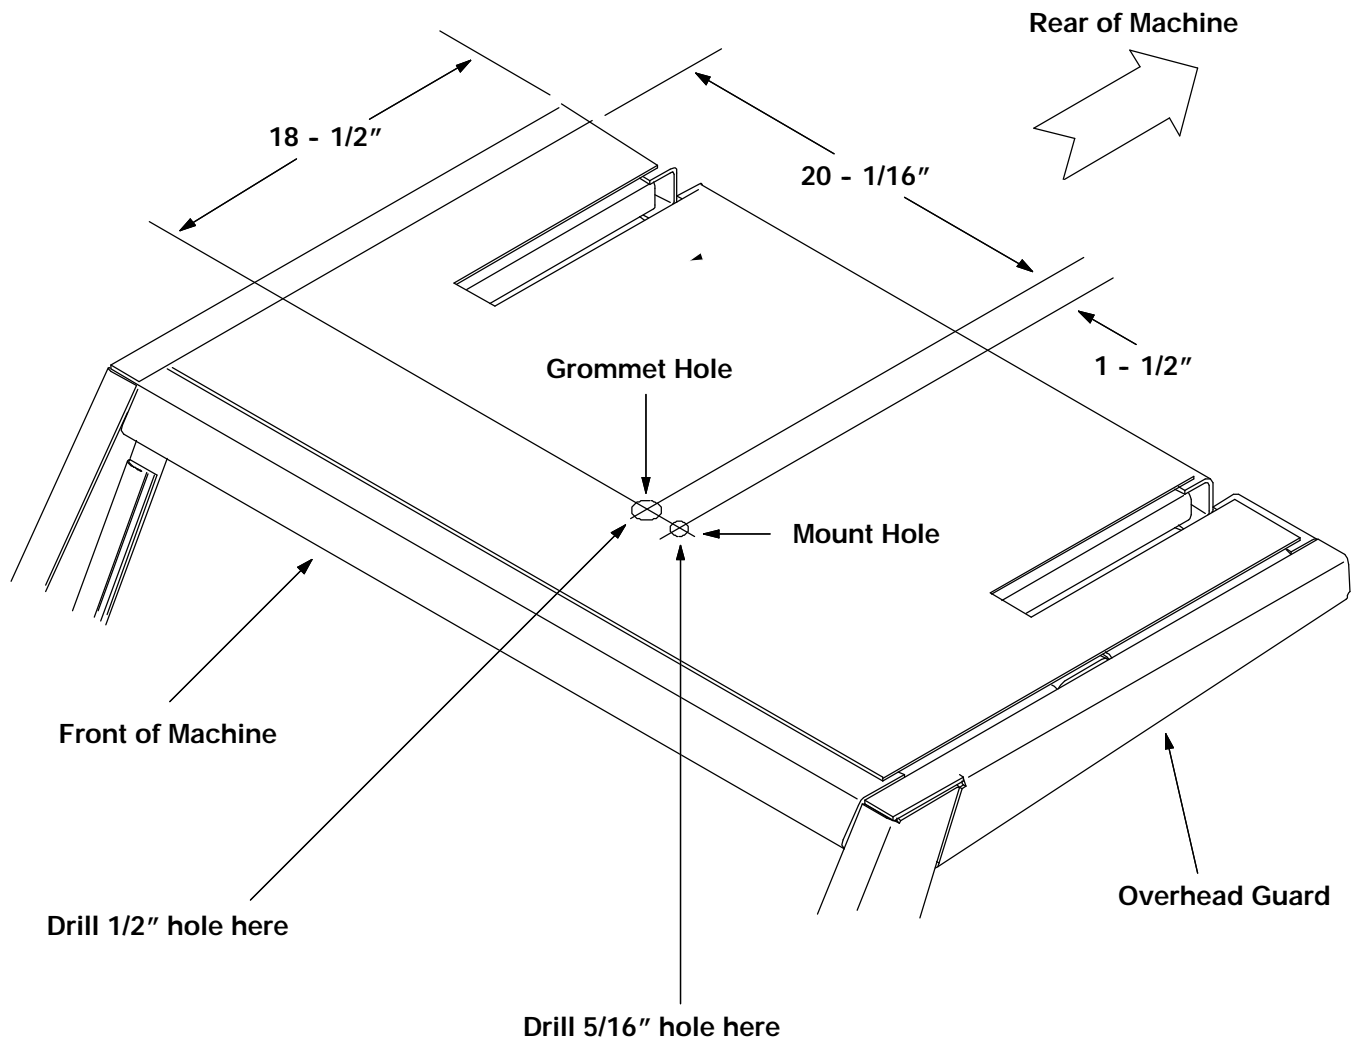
Dimensions of Holes to be Drilled for Revolving Light
